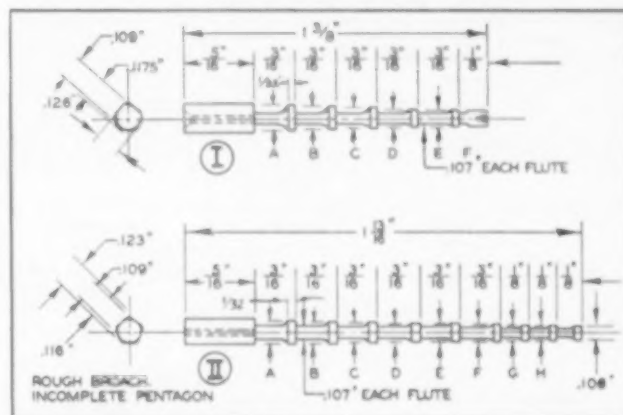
is the finish broach. On both broaches, grind flutes and pentagon shape after hardening. Leave 0.007 in. oversize to grind; leave 0.25 in. shank on broaches. Dimensions are as follows:
